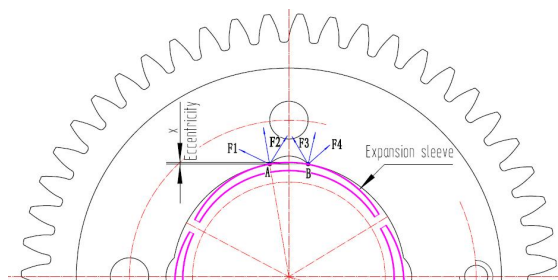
The schematic of positioning and clamping of gear grinding tools
